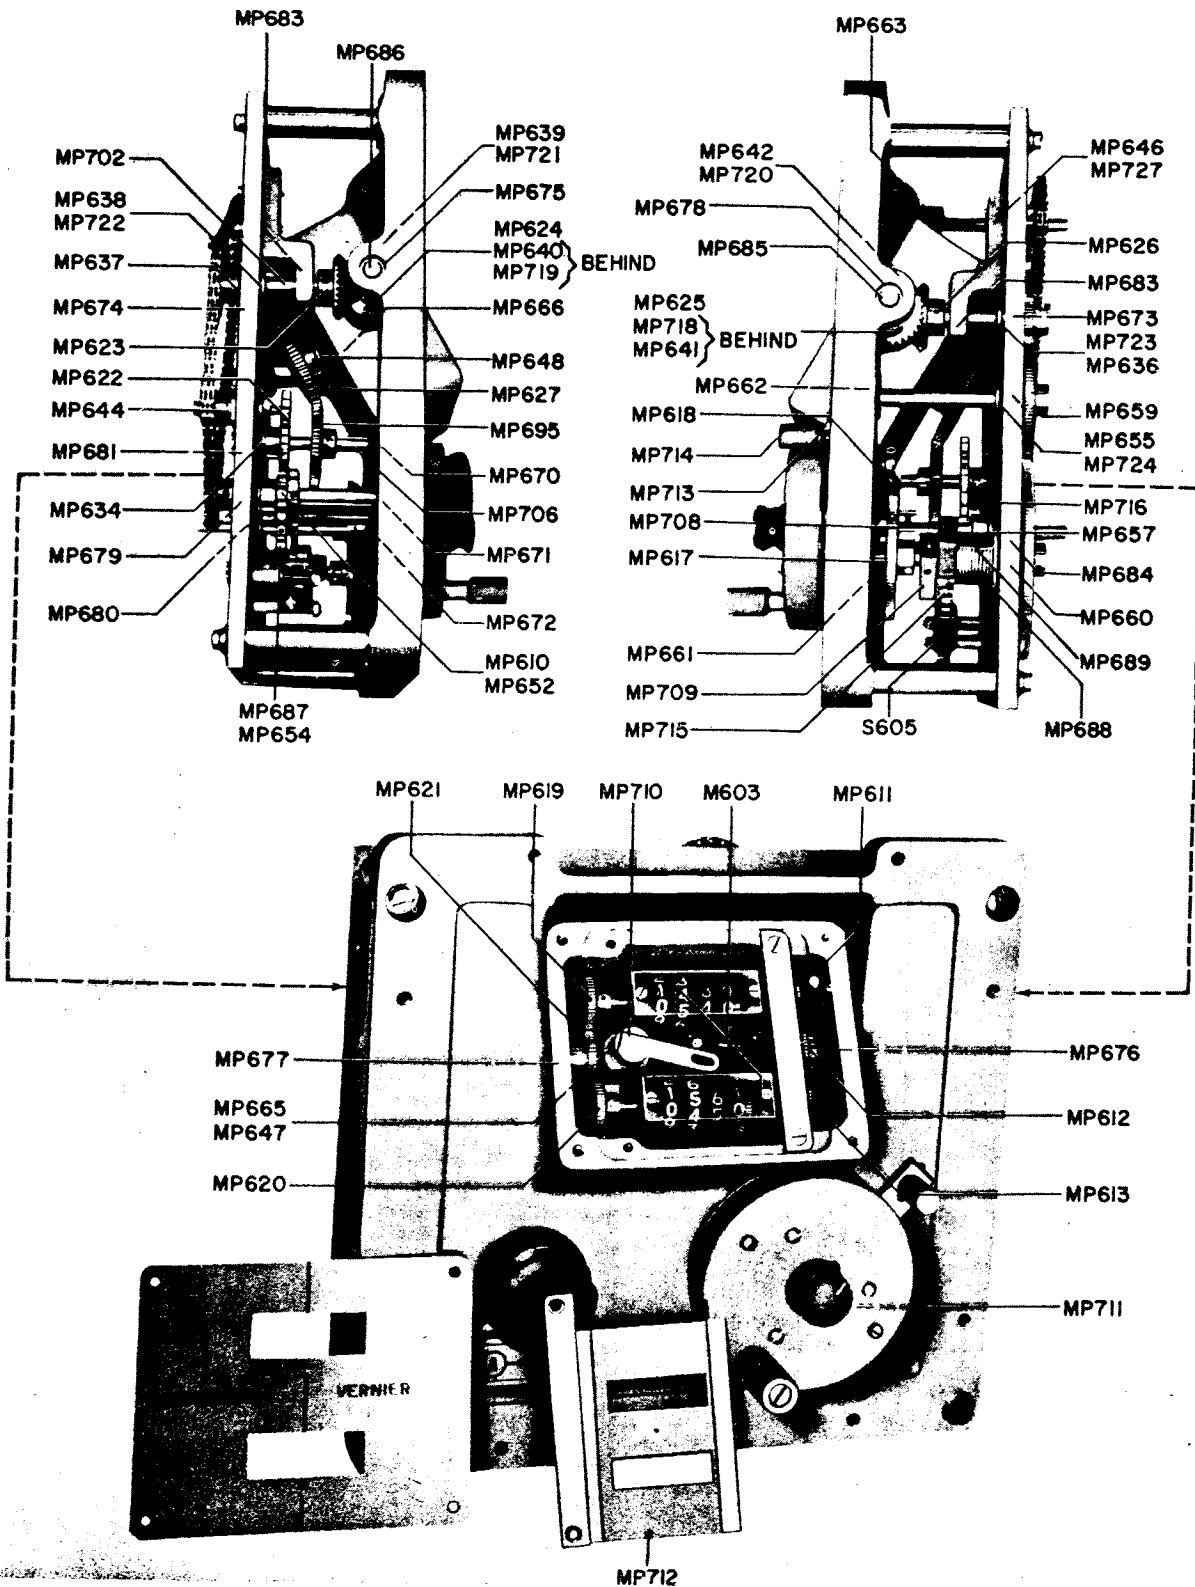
Electrical Frequency Control C-2861/WRT-1, Location of Parts in Gear B x
